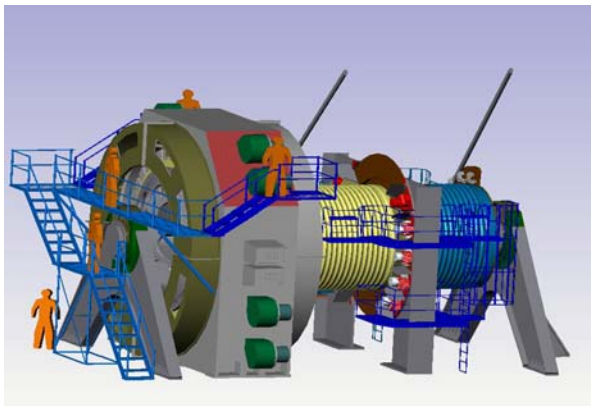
Cross section Showing Motor Poles, Extended Drum and Bearing Assemblies
